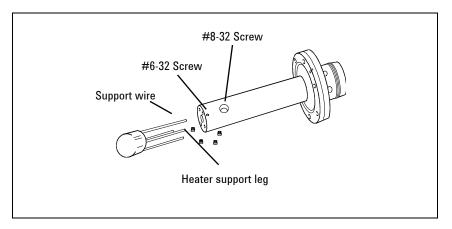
Mini Ti-Ball™ Source Assembly and Holder
